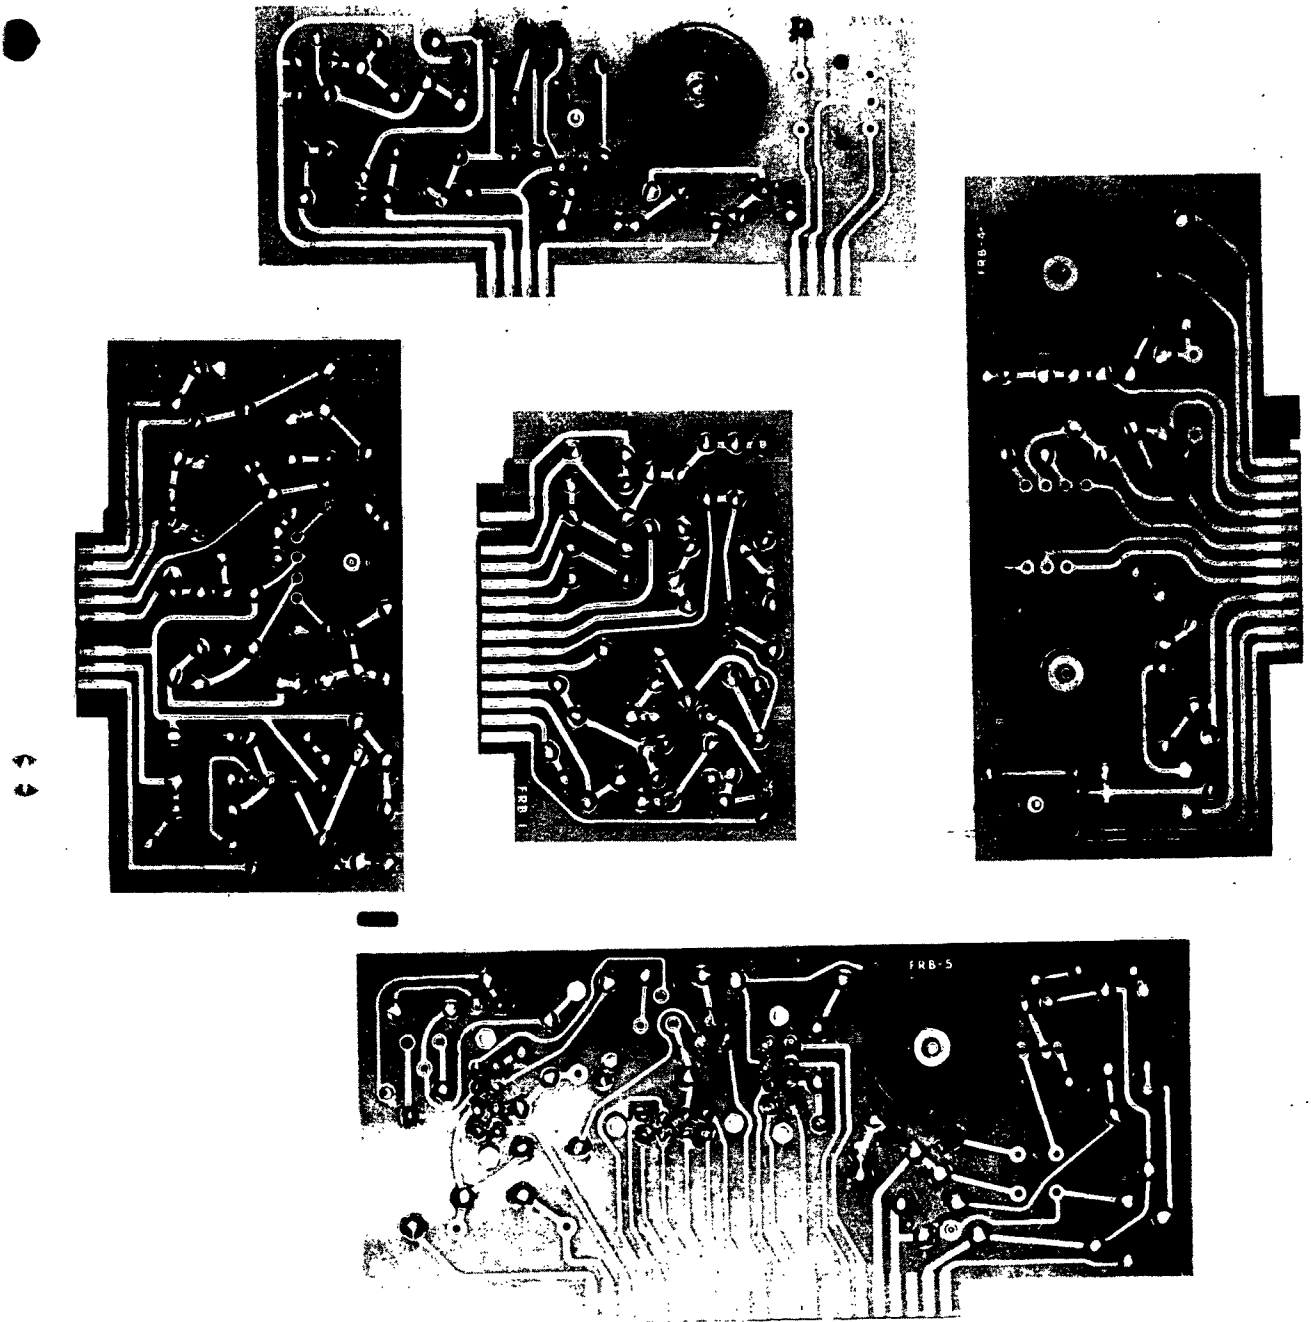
Bottom View - Prototype Transistorized Printed Circuit Plug-in Cards
